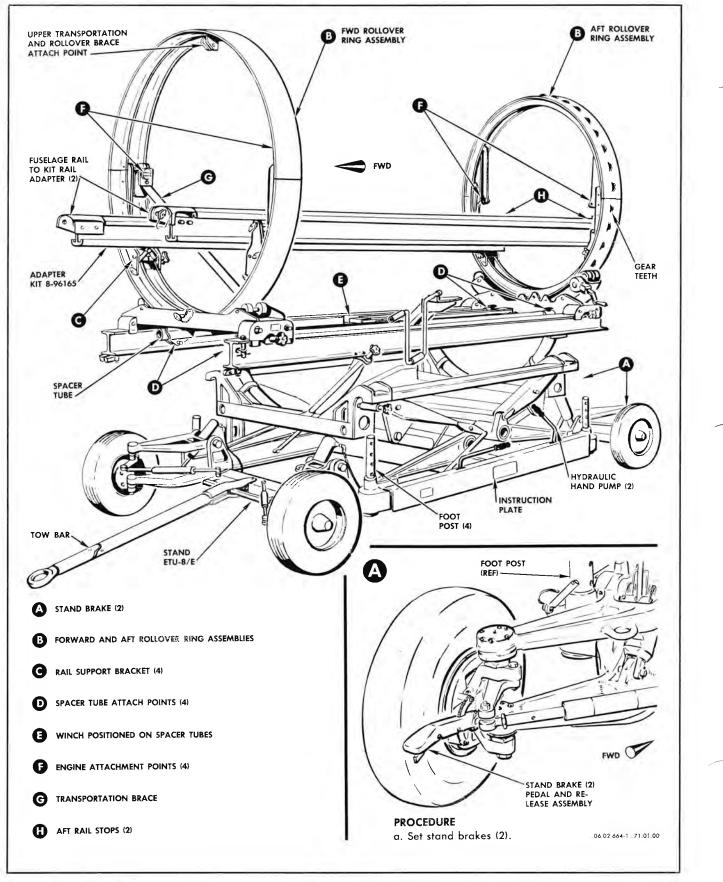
Engine Stand Preparation, Type USAF ETU-8/E Using Adapter Kit 8-96165 (Sheet 1 of 3)
